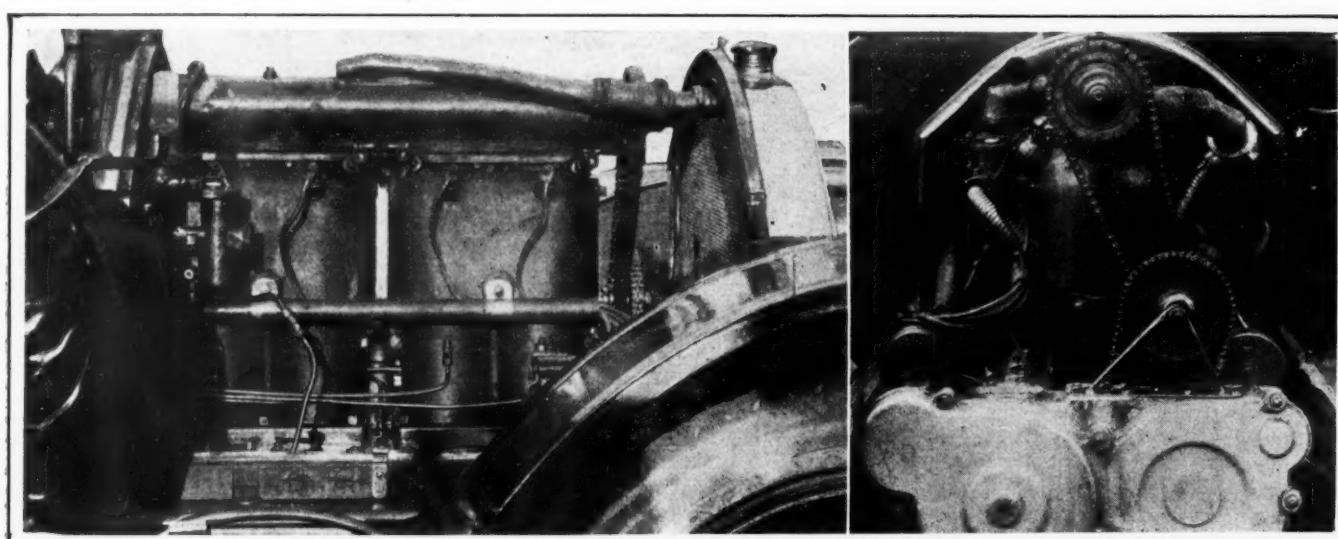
Side view of Bournonville motor installed in Flat chassis—Arrangement of chain valve drive on experimental job
